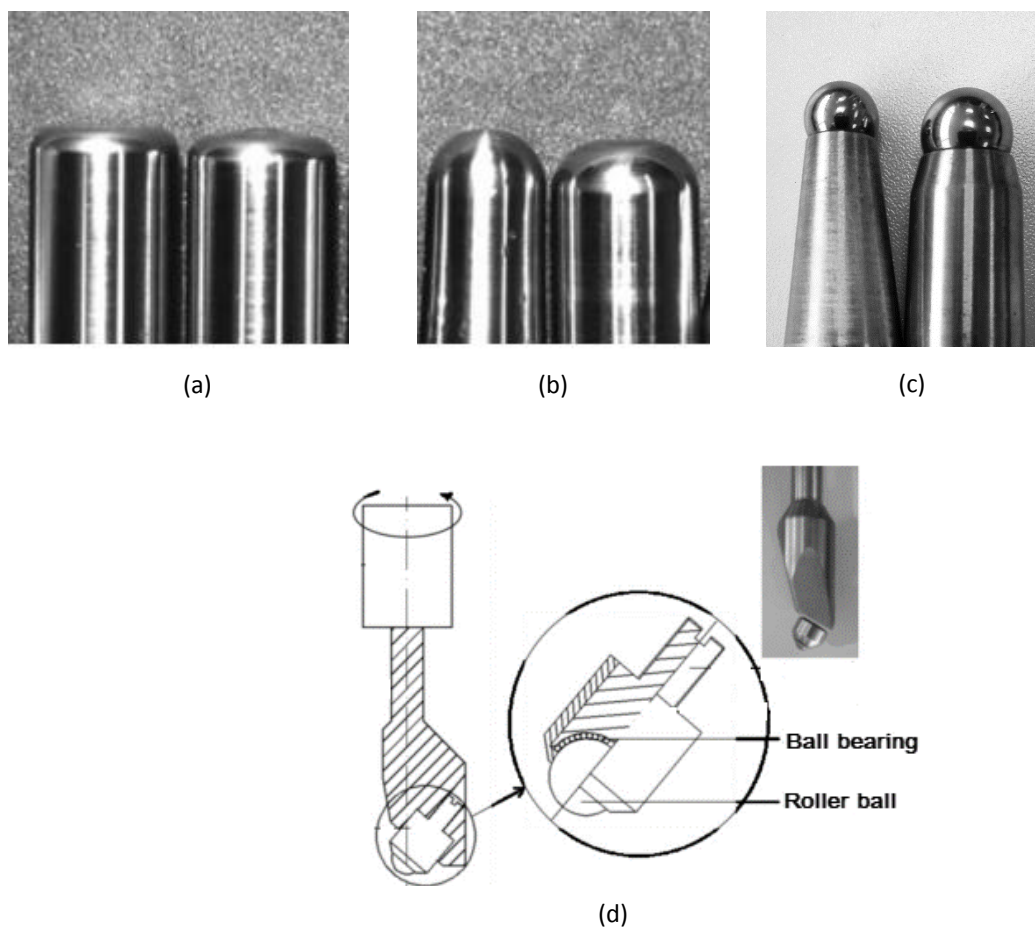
Types of forming tools used in SPIF: (a) flat end forming tool (b) hemispherical end forming tool [50] (c) Spherical end forming tool [51] and (d) Oblique roller forming tool [52]
